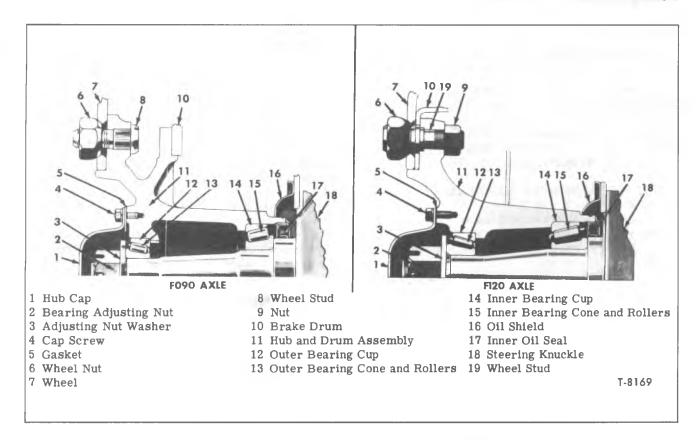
Front Hubs and Bearings (Disc Type Wheels)
